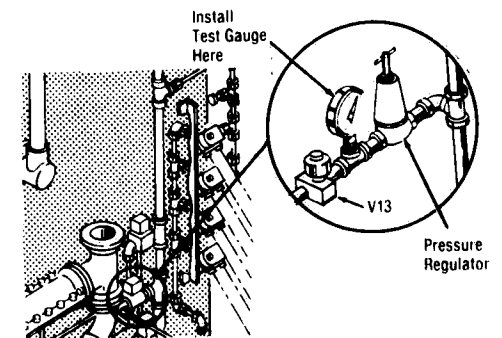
INSTALL TEST GAUGE IN COLD WATER SUPPLY.
